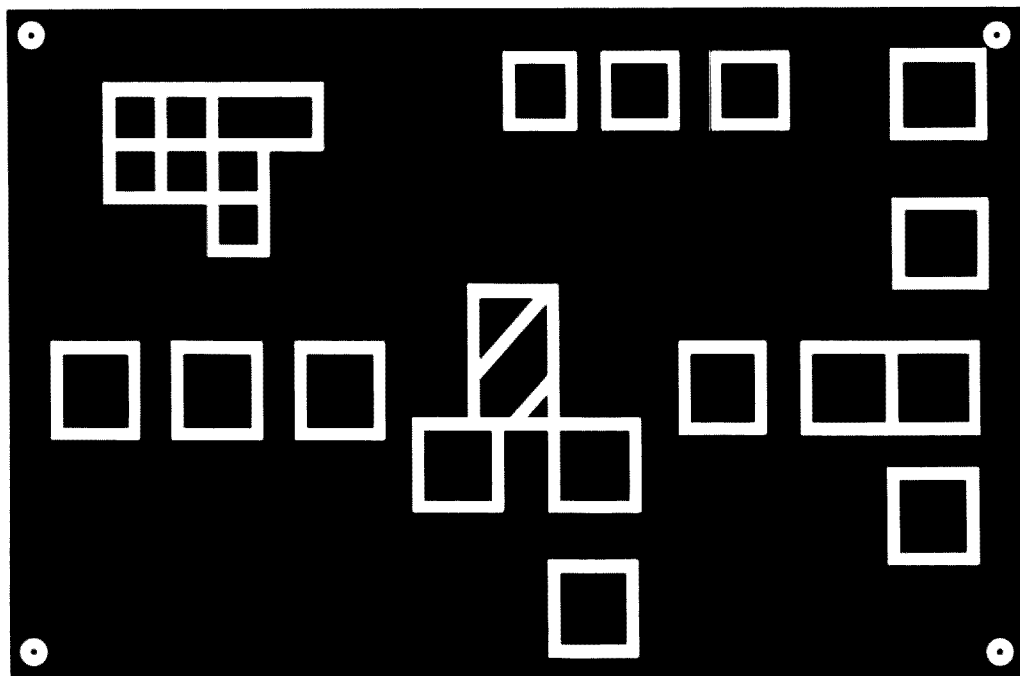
PC board foil pattern. Cut out hole for Q1 in center of board.
